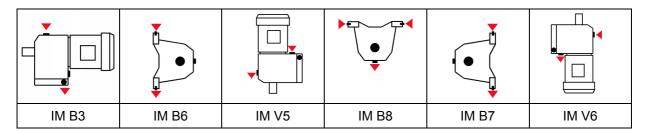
Examples of the multiple use of standard holes in the gear unit enclosure allowing the oil to be changed in situ
